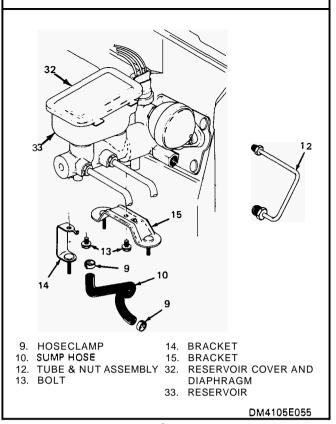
Sump Hose, Tube & Nut Assembly and Brackets
